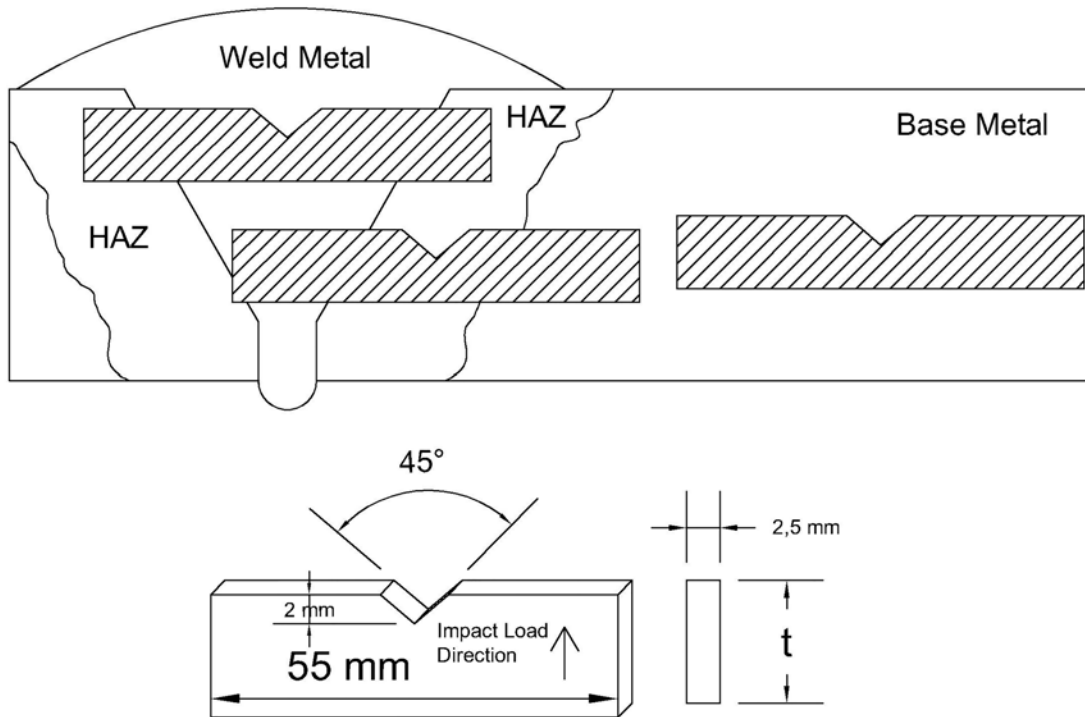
Dimensions of impact test specimens and notch locations acc. to the standard
